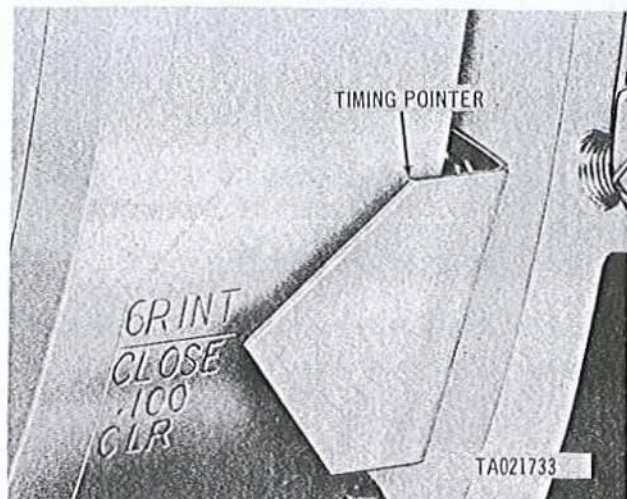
Flywheel timing marks alined with pointer for valve timing - right bank of cylinders, model AVDS-1790-2C and AVDS-1790-2D engines.
